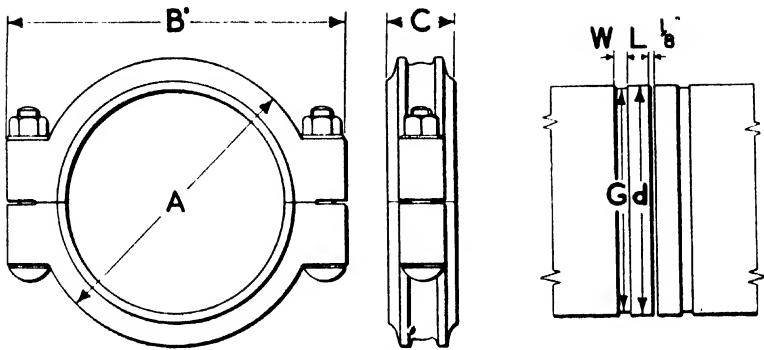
VICTAULIC JOINTS FOR GROOVED TUBES
